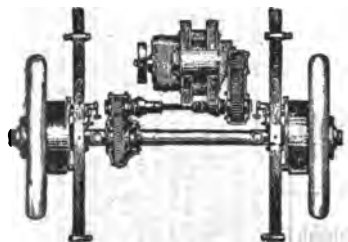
,064.—Waverly double reduction gear or combination herringbone and so called "silent" chain.
